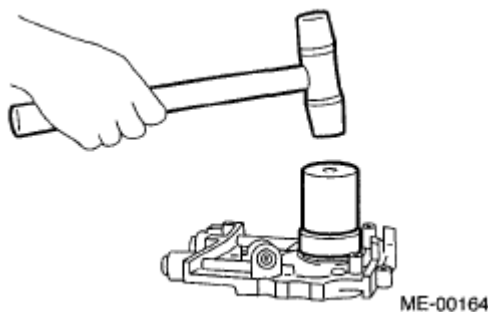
Installing Front Oil Seal Using Oil Seal Installer ST 499587100
